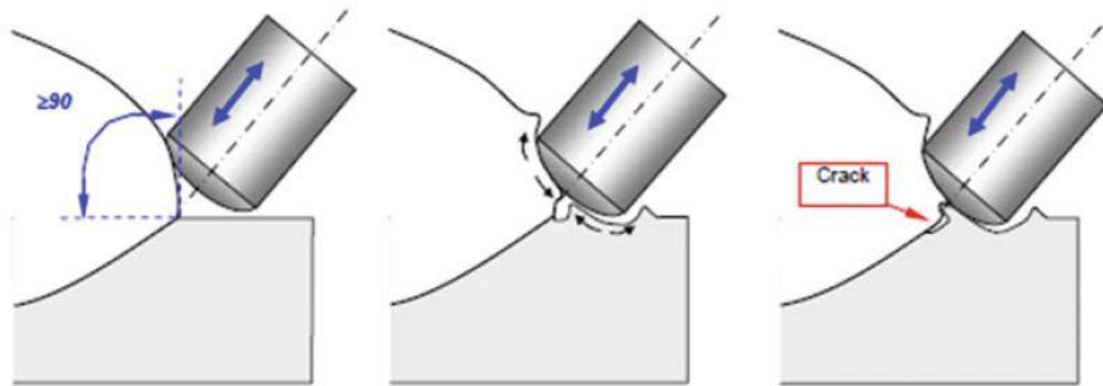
6: initiation of a crack-like defect due to an inappropriately treated weld toe presenting a steep angle, or due to a too large-sized indenter [9].
